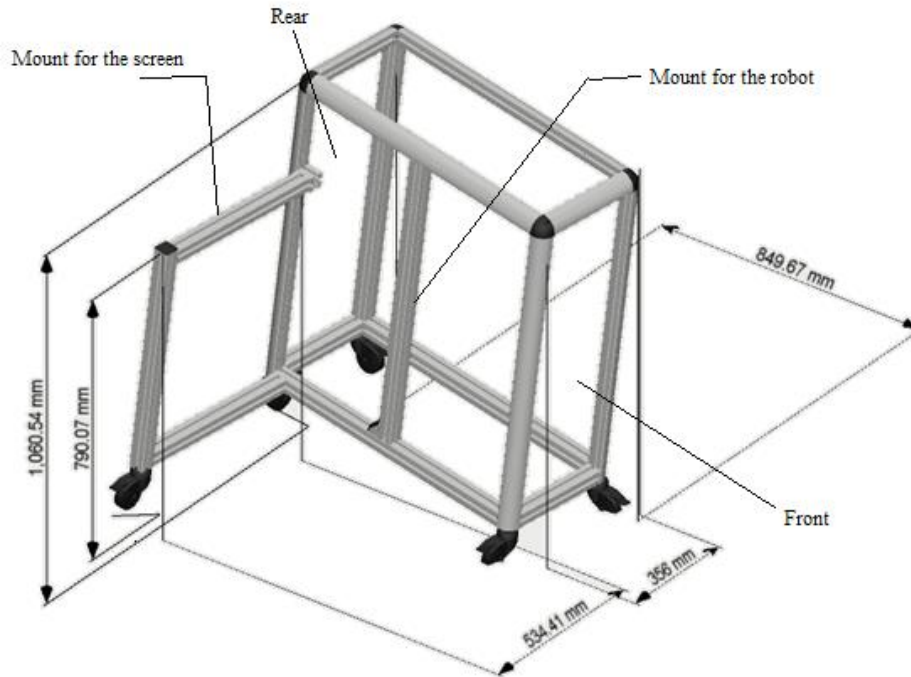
Dimensional drawing of the trolley design where the robot was mounted
